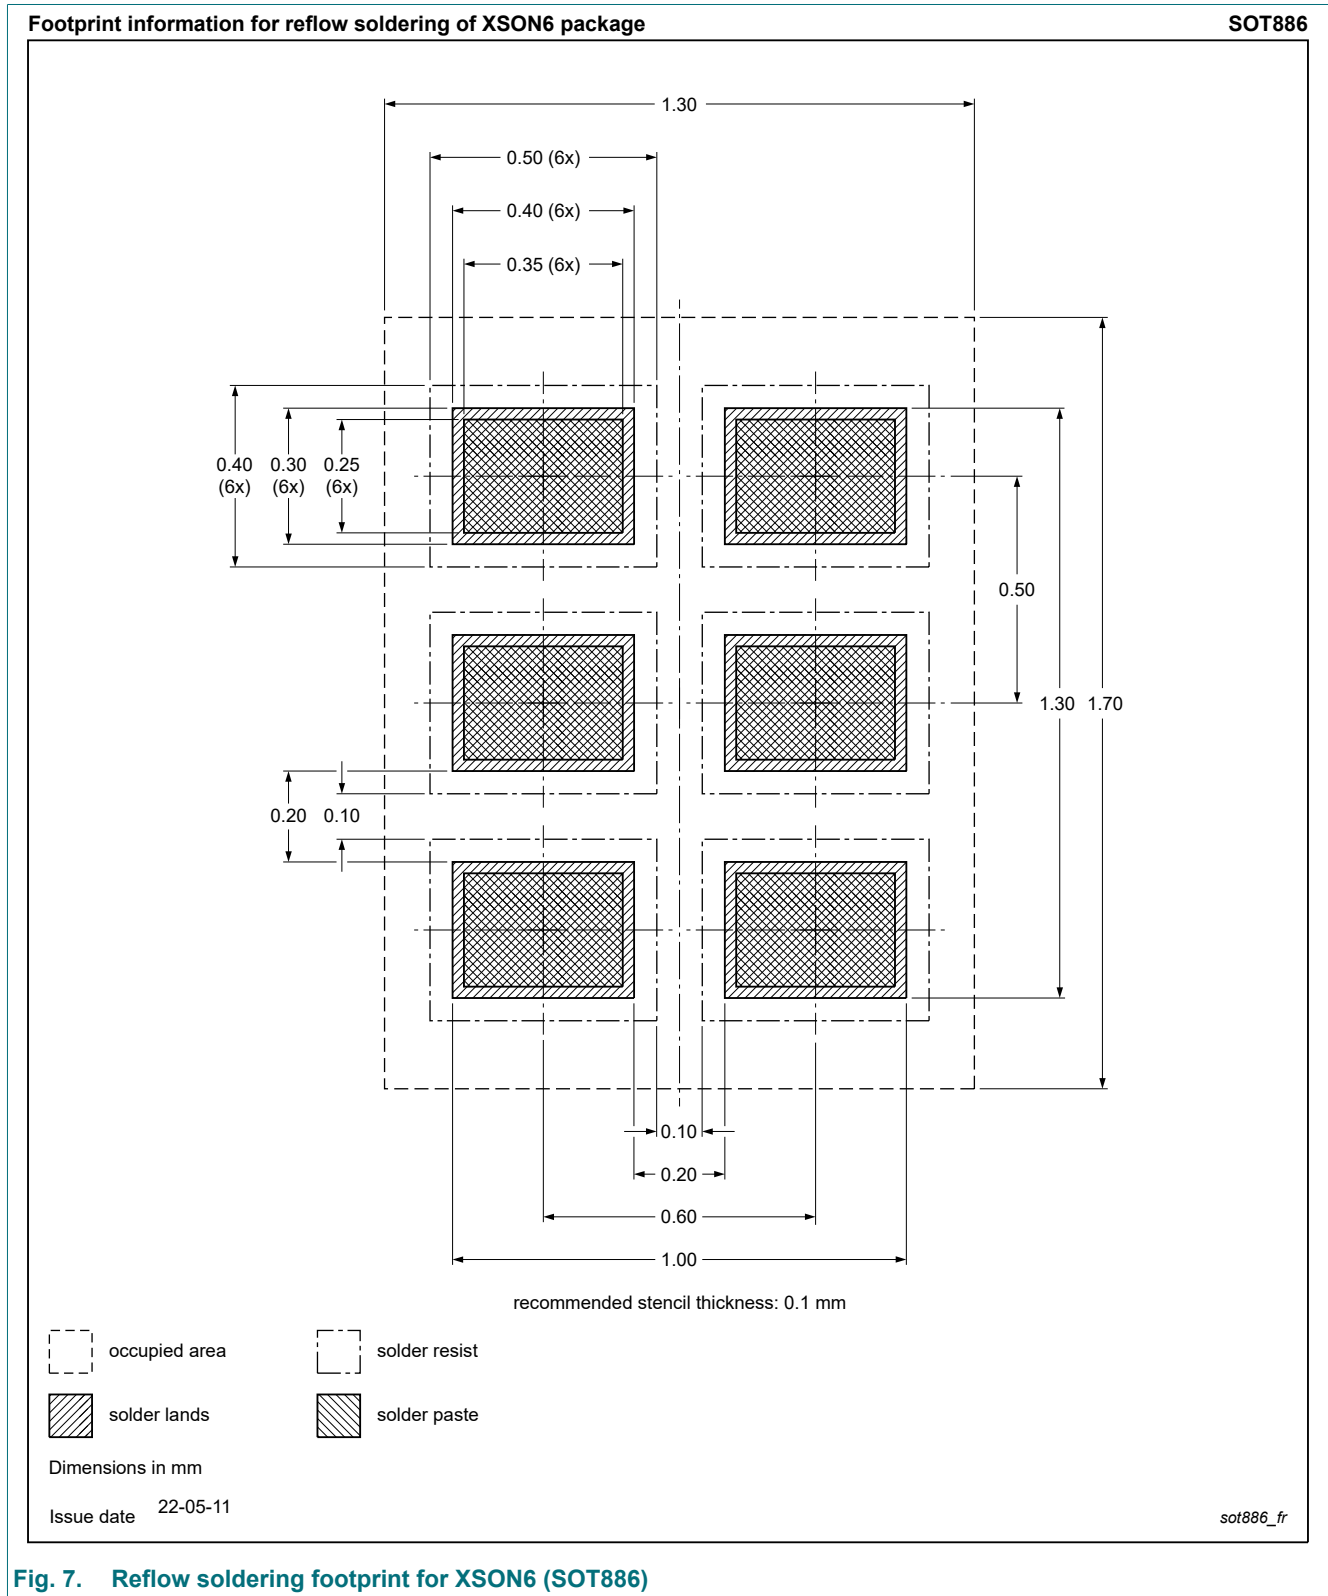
Reflow soldering footprint for XSON6 (SOT886)
